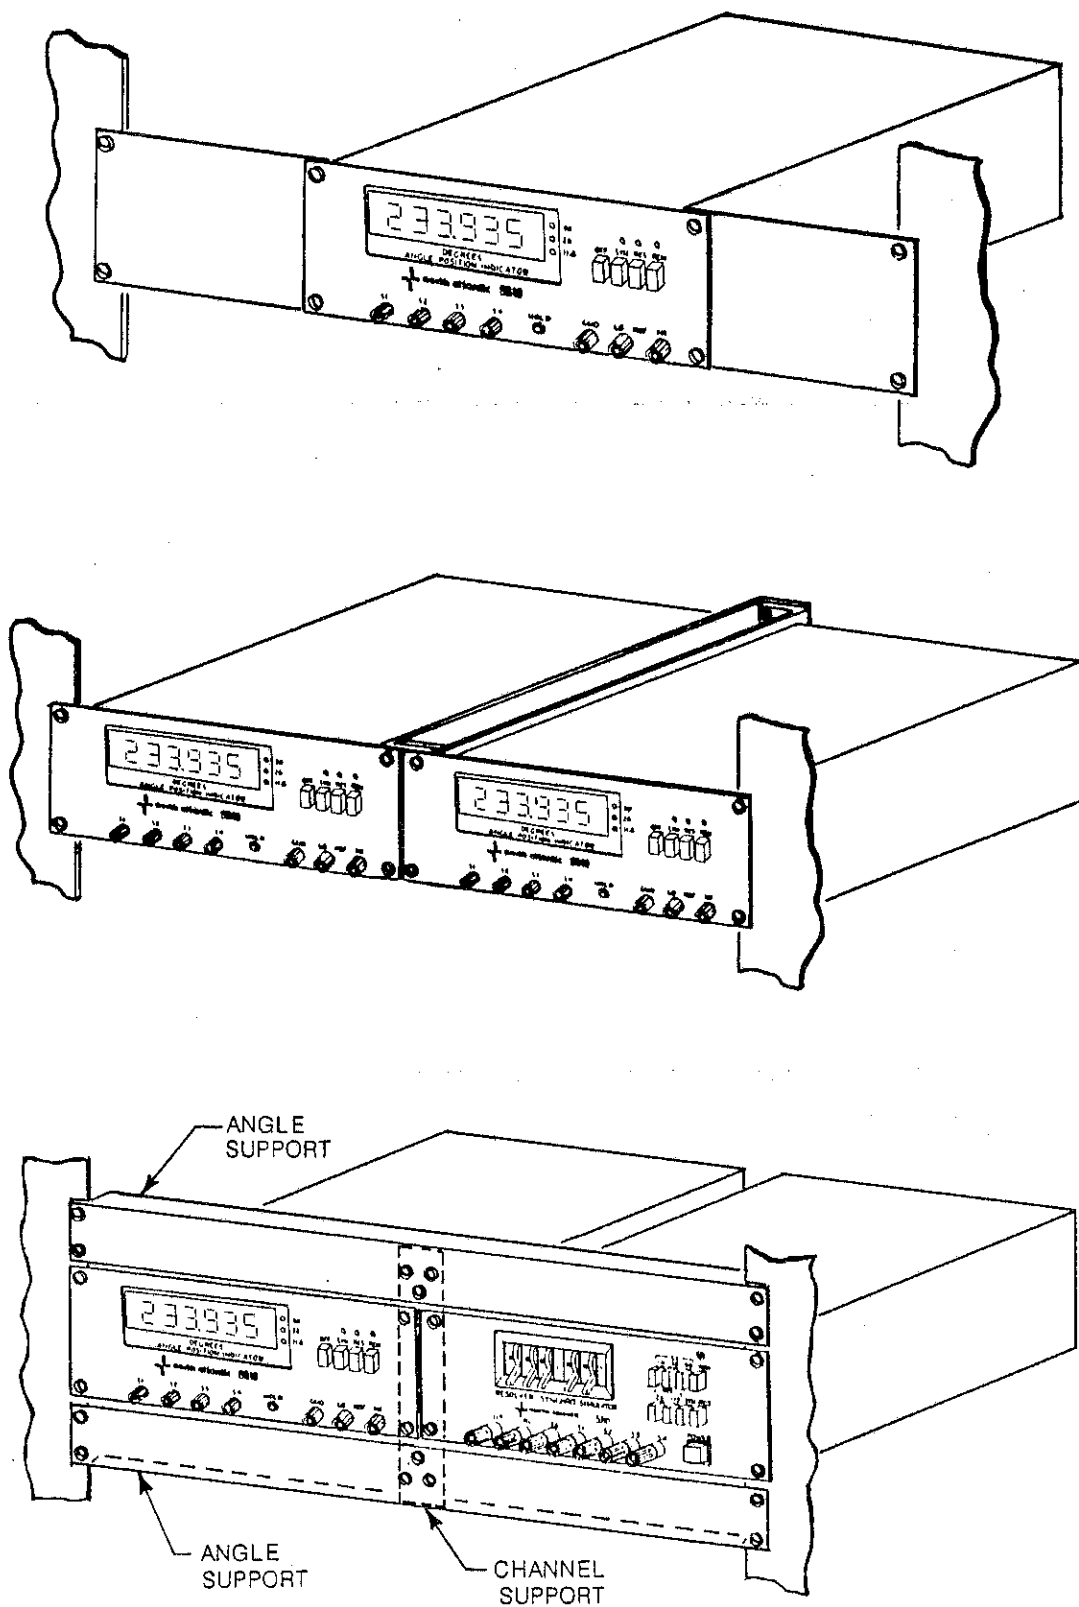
Full Rack and Tandem Rack Mounting Adapters
